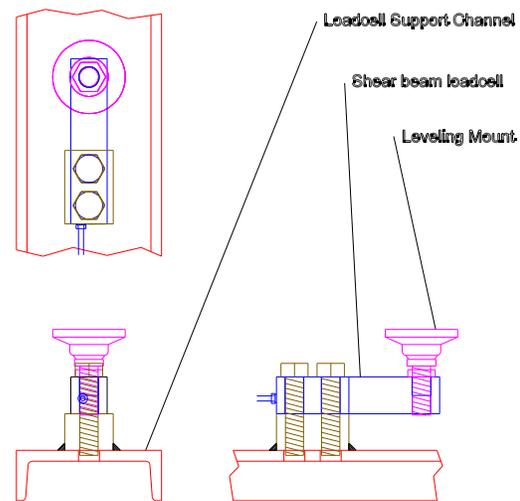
Top-, front-, and side-view drawings of the loadcell mounting assemblies.
